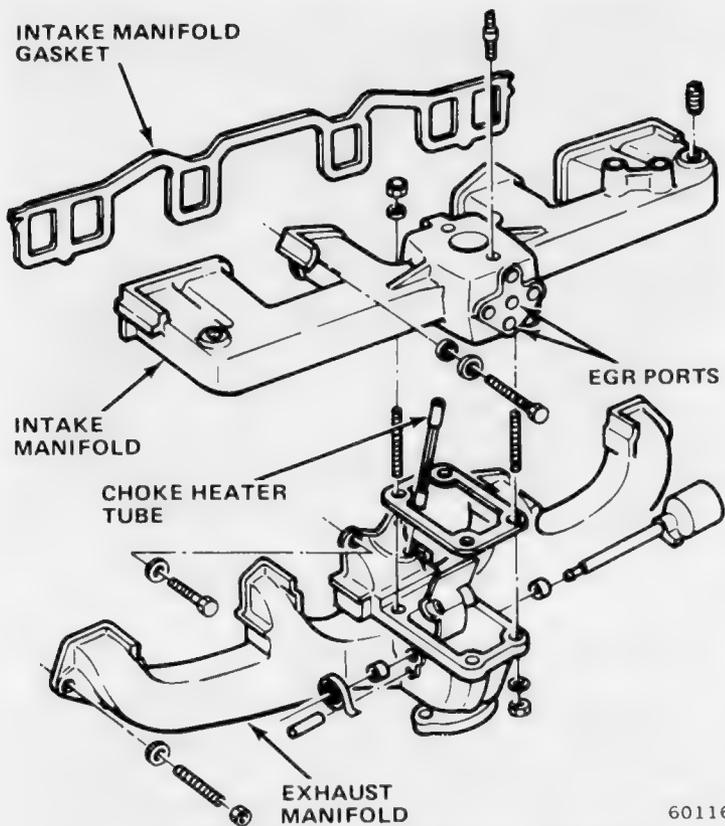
B-90 Intake and Exhaust Manifold Assembly
